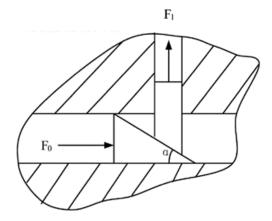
illustrates a gearing comprising cams in the form of wedges. A horizontal reciprocating movement of the lower wedge is conveyed into a vertical reciprocating movement of the upper wedge.
